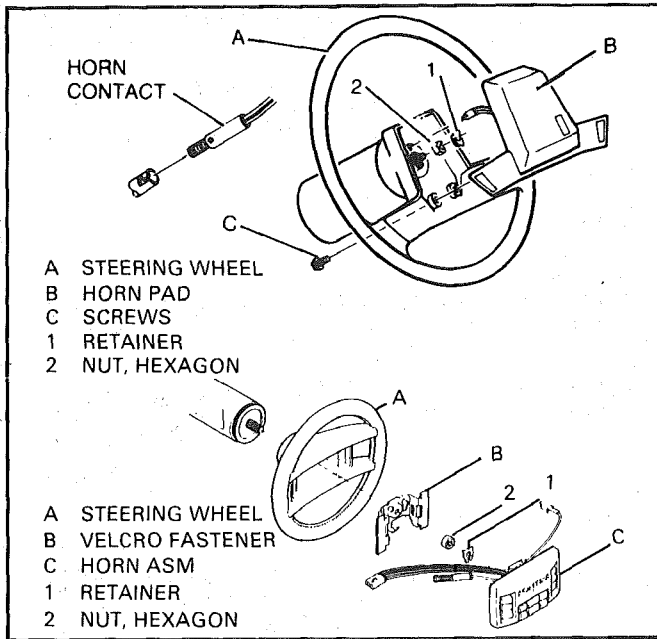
Removing Horn Pad, Retainer, and Jam Nut
